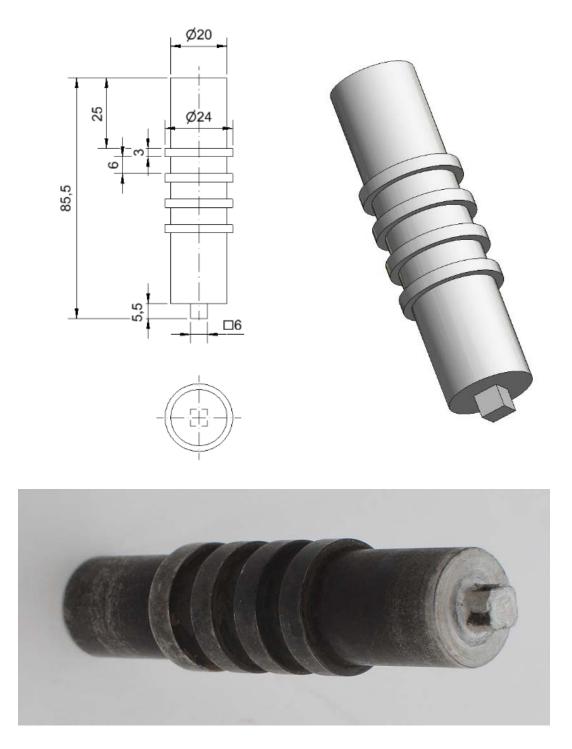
Tool geometry used for the friction stir welding of AA 6101 T6 alloy - Square pin profile with flat shoulder (C2)
